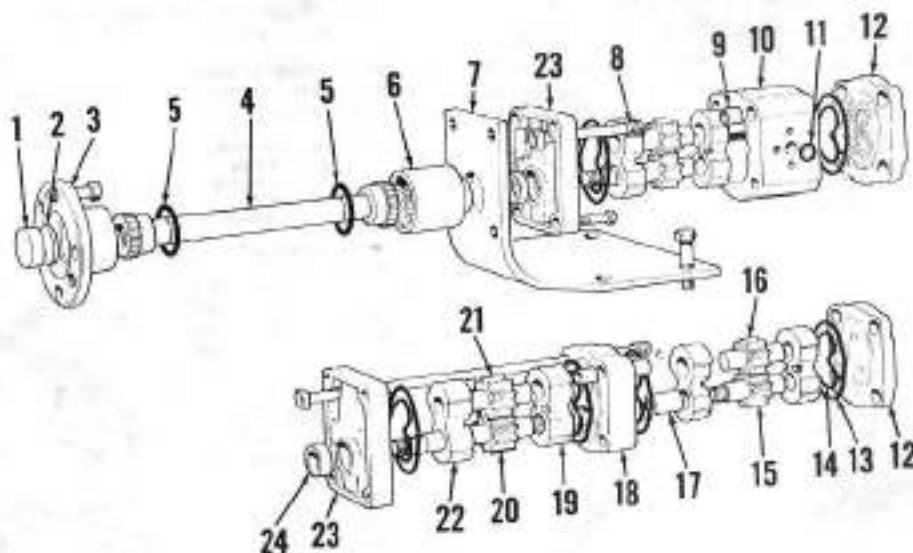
Exploded view showing construction of both the single and dual pump assemblies typical of type used on 1210, 1212, 1410 and 1412 models. Pump drive components and mounting bracket are also shown; pump is mounted in front of radiator (see Fig. 295) and is driven from engine crankshaft through shaft (4).
